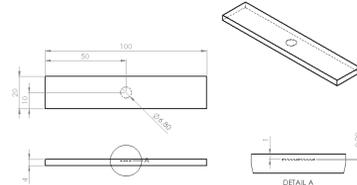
Specimen design and geometric dimensioning (all dimensions in mm)
